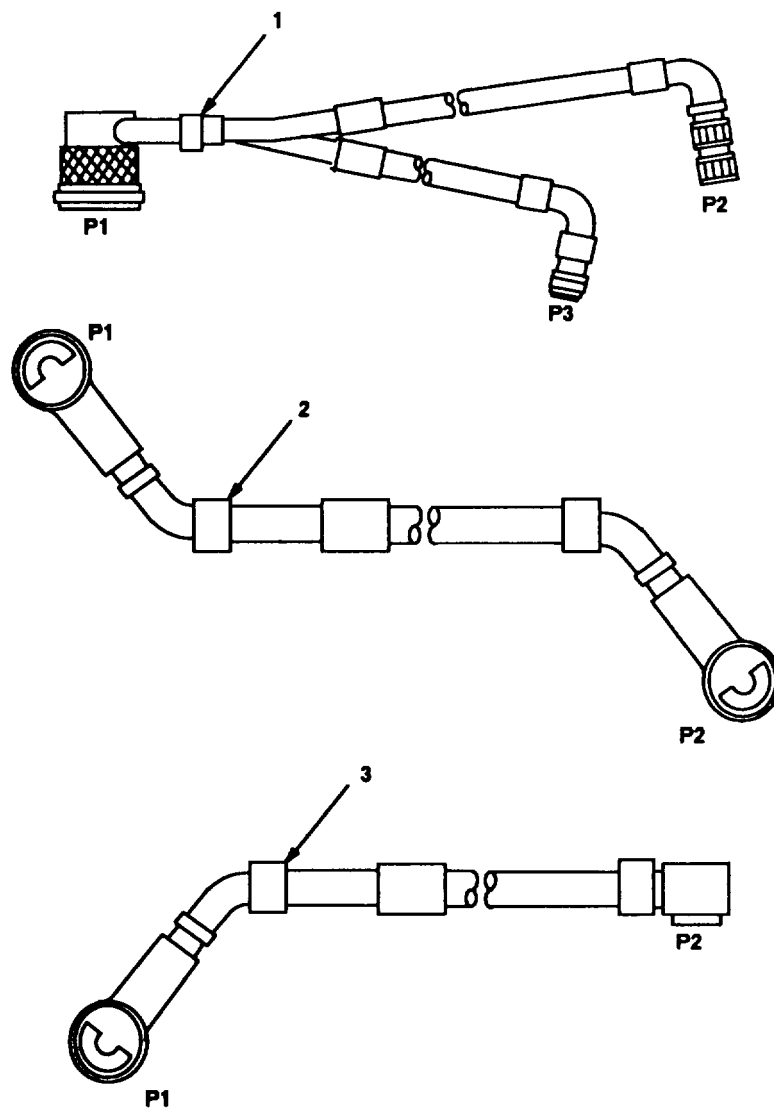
TSEC/KY-57 Illustrated Parts List
